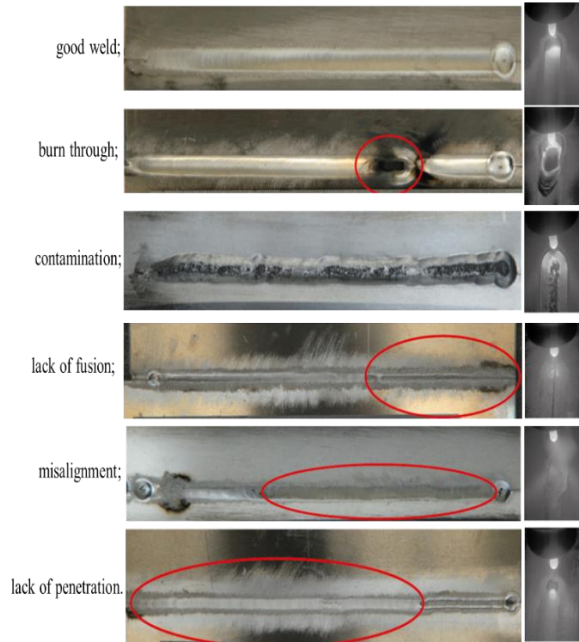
Dataset samples: good weld; burn through; contamination; lack of fusion; misalignment; lack of penetration. [33]
